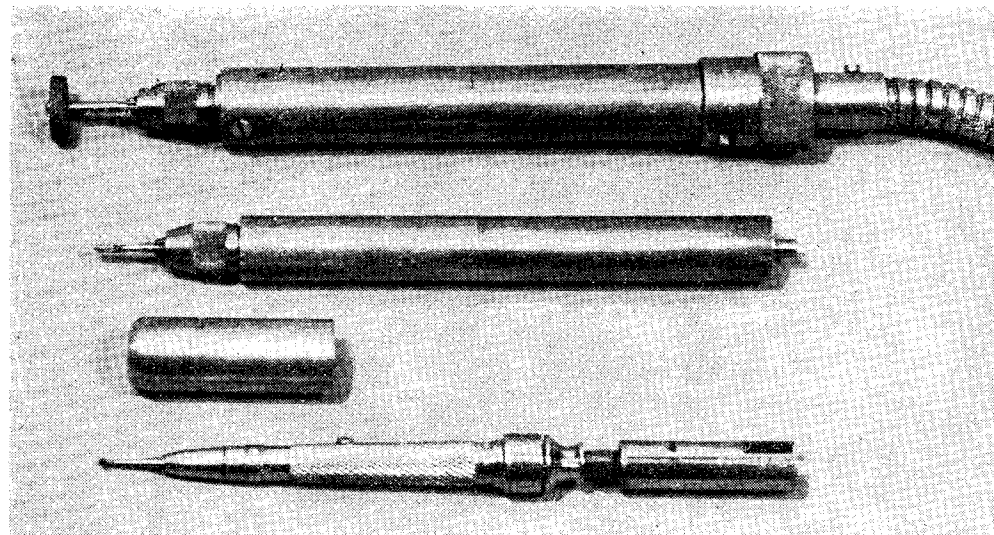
Above—Heavy duty hand-piece with bayonet cap attachment to Aero-spares flexible shaft. Tommy bar hole shown for locking spindle when tightening chuck. One-piece casing with heavy thrust race and detachable main bearing bush. Centre—Model described in text with chuck cover hood below. Tommy bar hole and stud for locking hood not shown. Below—Dentist's hand-piece, showing automatic chucking of drill by pulling knurled section of body forwards from shaft slip-joint connection
